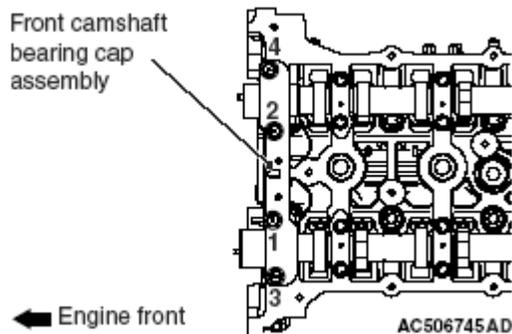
Identifying Front Camshaft Bearing Cap Assembly
